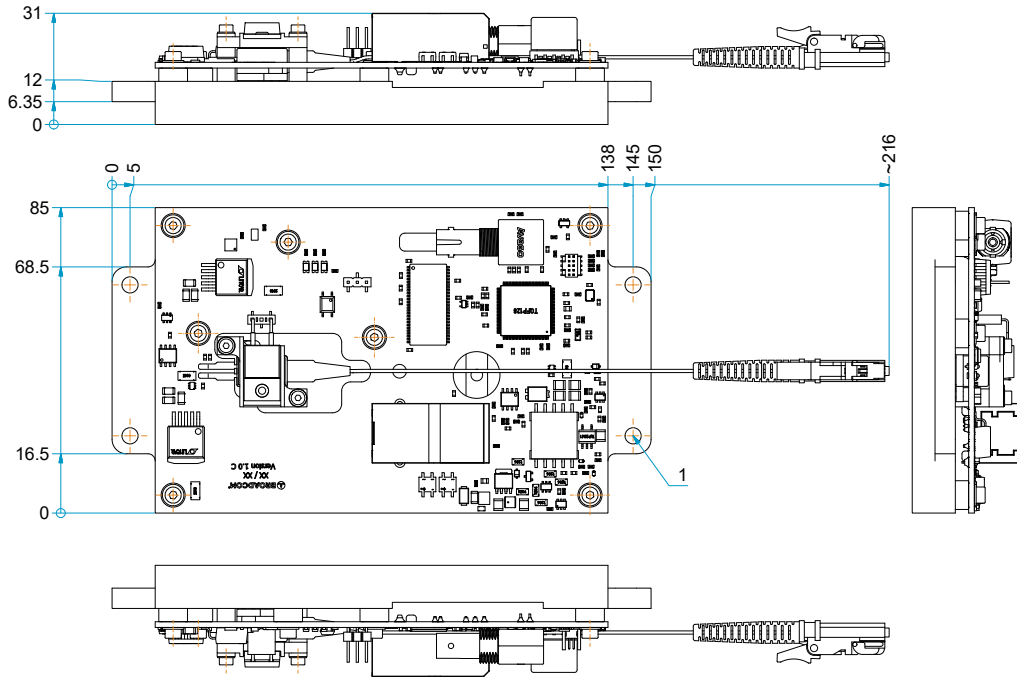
Tx Module Schematic (Dimensions in Millimeters)
